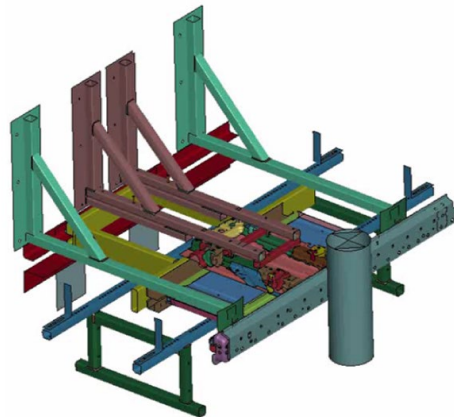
Test fixture engineered for the battery enclosure. Source: GM.
